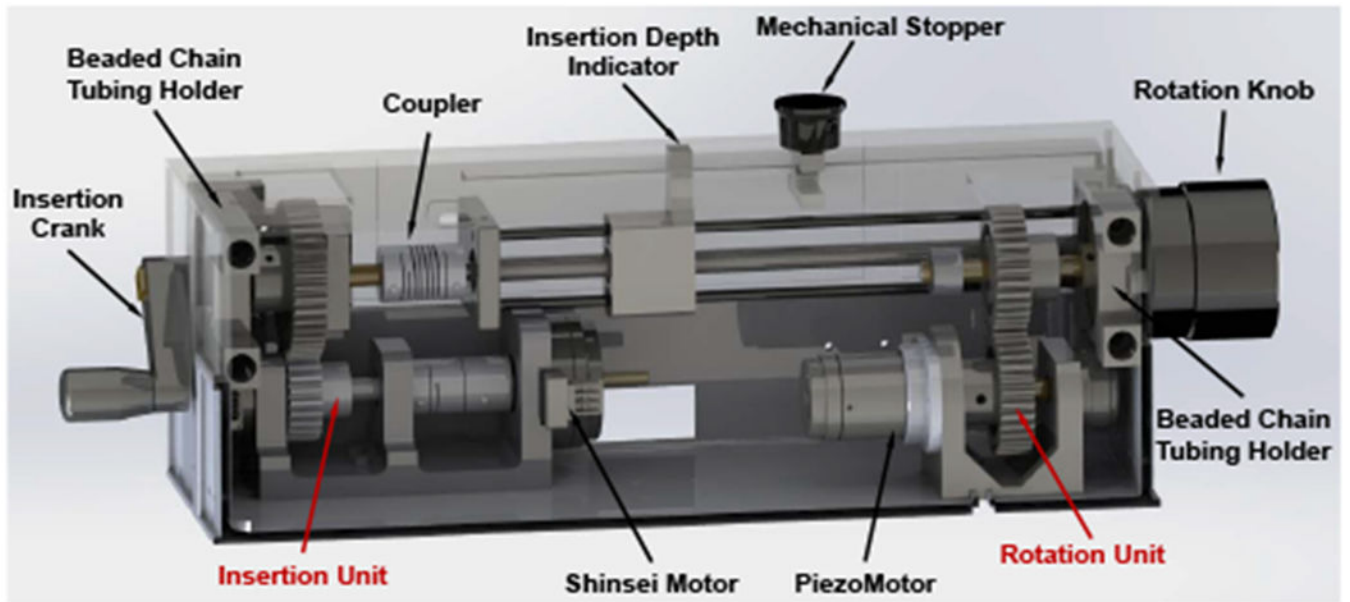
CAD model of the needle driver actuation box, showing the insertion unit and rotation unit. The presented setup is the motorized mode, the gears are engaged. Once the upper box is lifted up, the gears will be disengaged and switch to the manual mode.
